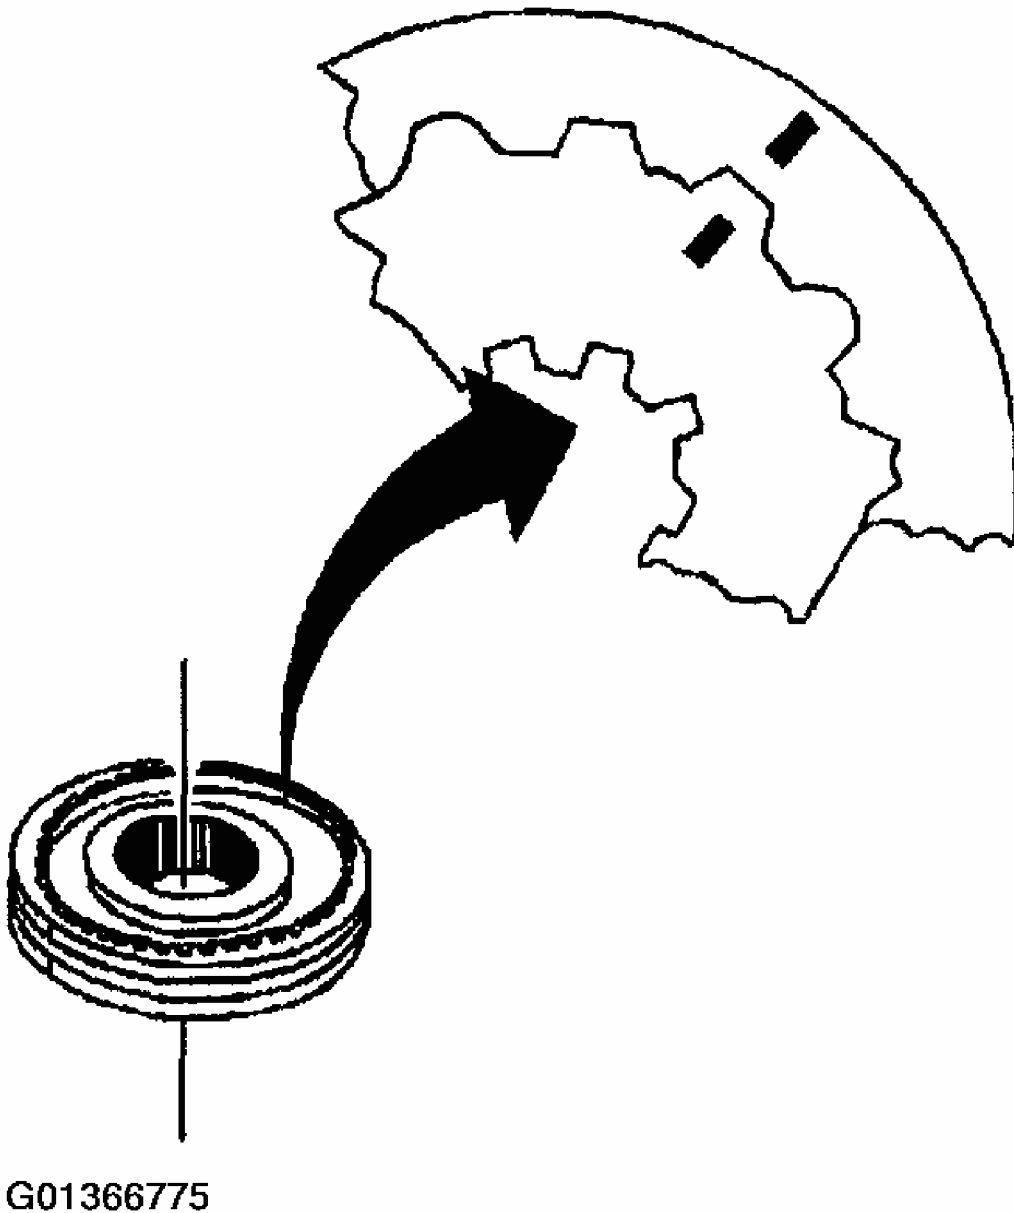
Checking 3rd/4th Speed Gear Synchronizer Assembly Scribe Marks For Correct Positions
